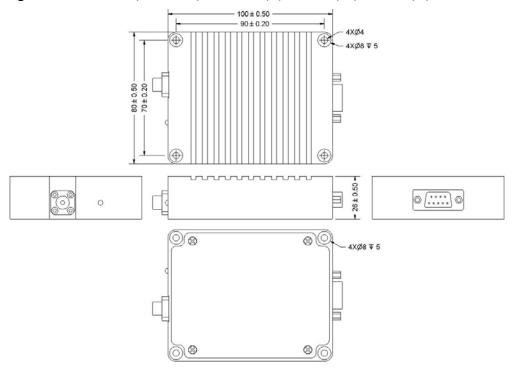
Mechanical drawing of module box (FC/APC connector with FC adaptor)
